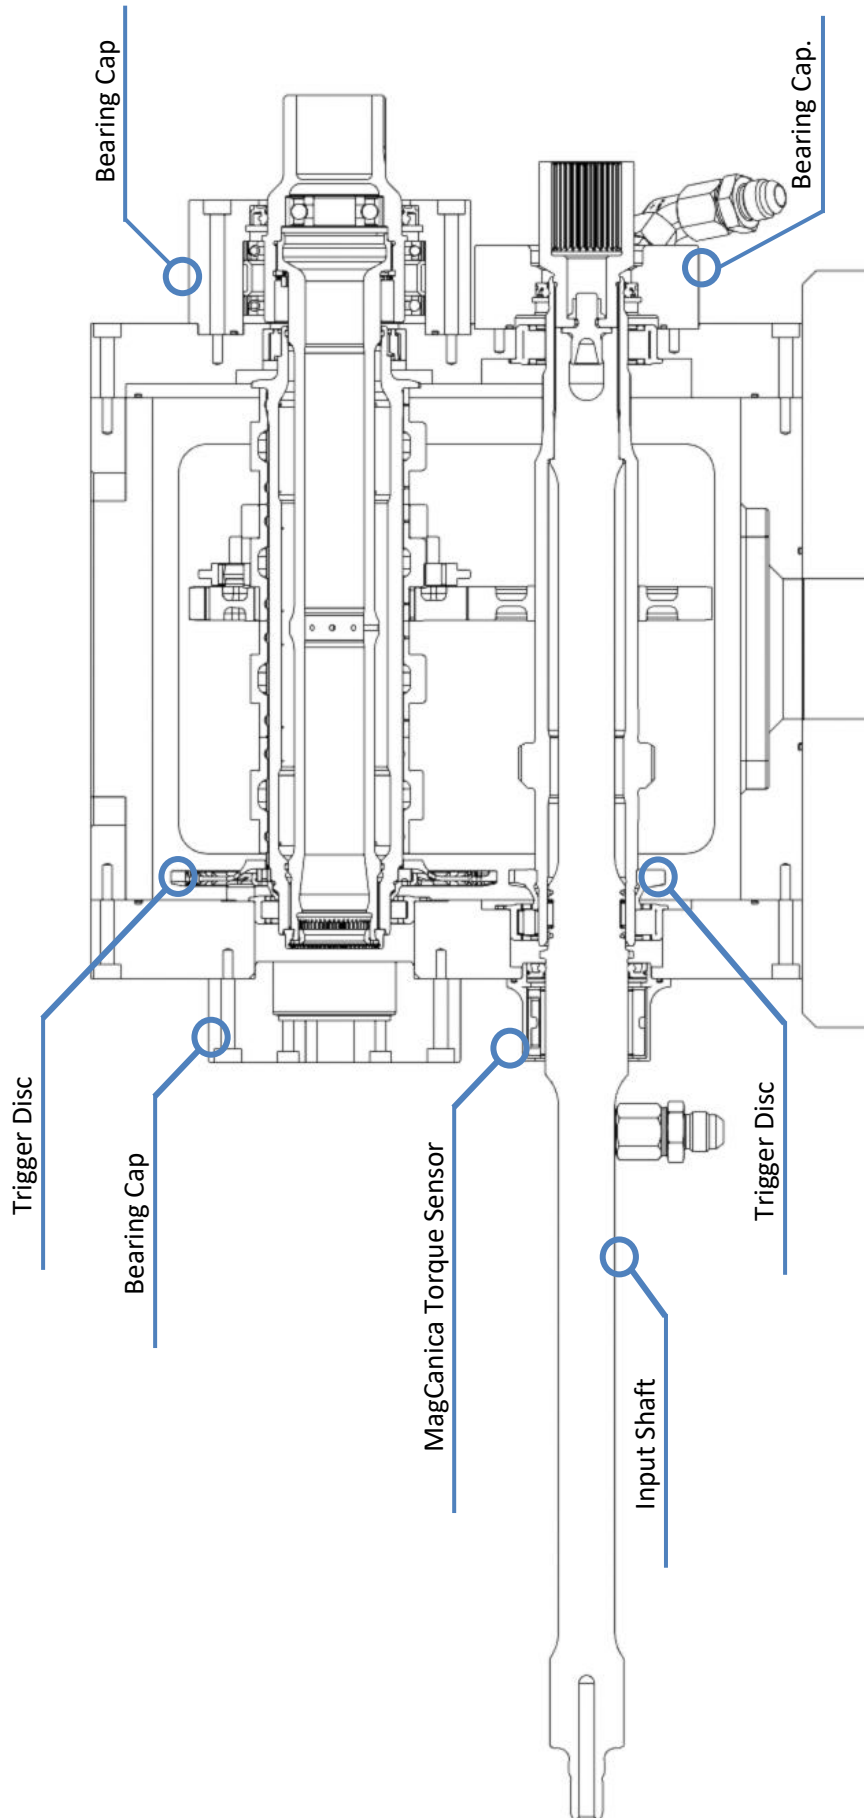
Planar section of the Cardiff gear test rig test housing.
